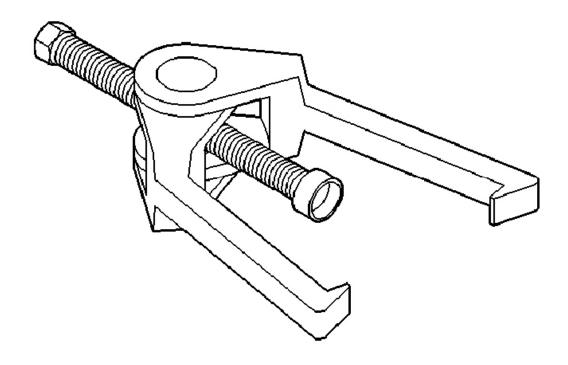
Puller C-3894-A Courtesy of CHRYSLER LLC
